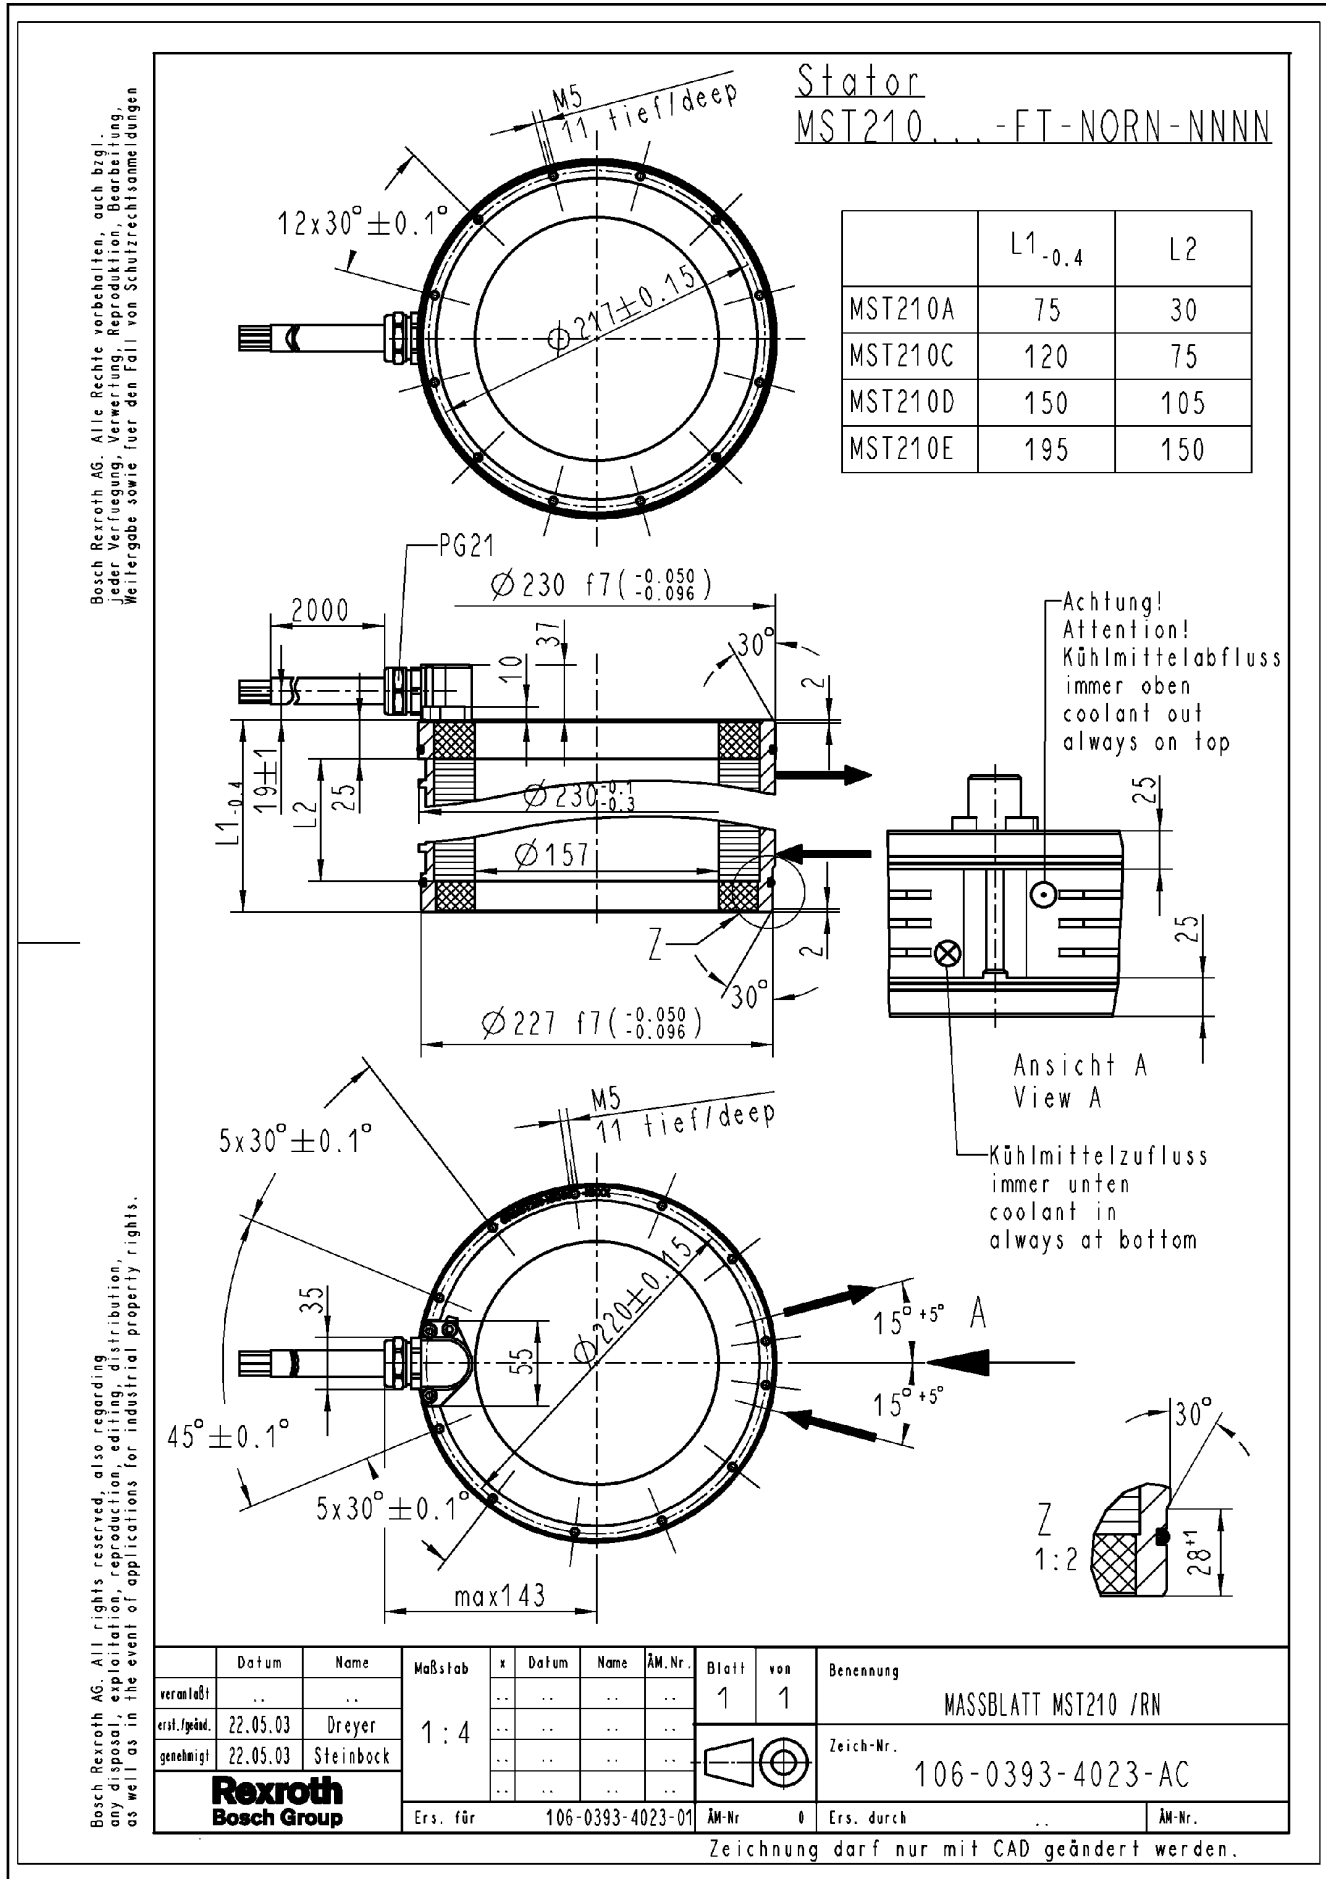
Dimension sheet MST210, electrical connection "RN"
